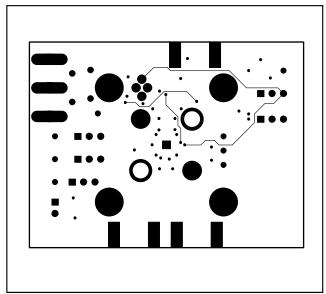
MAX3996 EV Kit PC Board Layout—Solder Side
